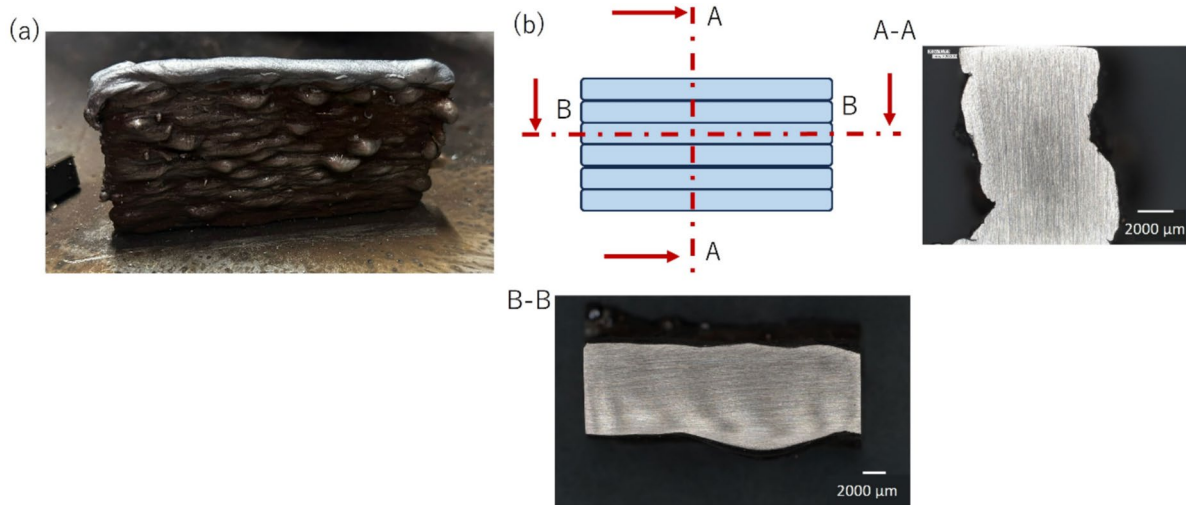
a Wall printed using optimized process parameters. b Sections of the wall examined under a Keyence VHX microscope, revealing no defects that could compromise component quality
